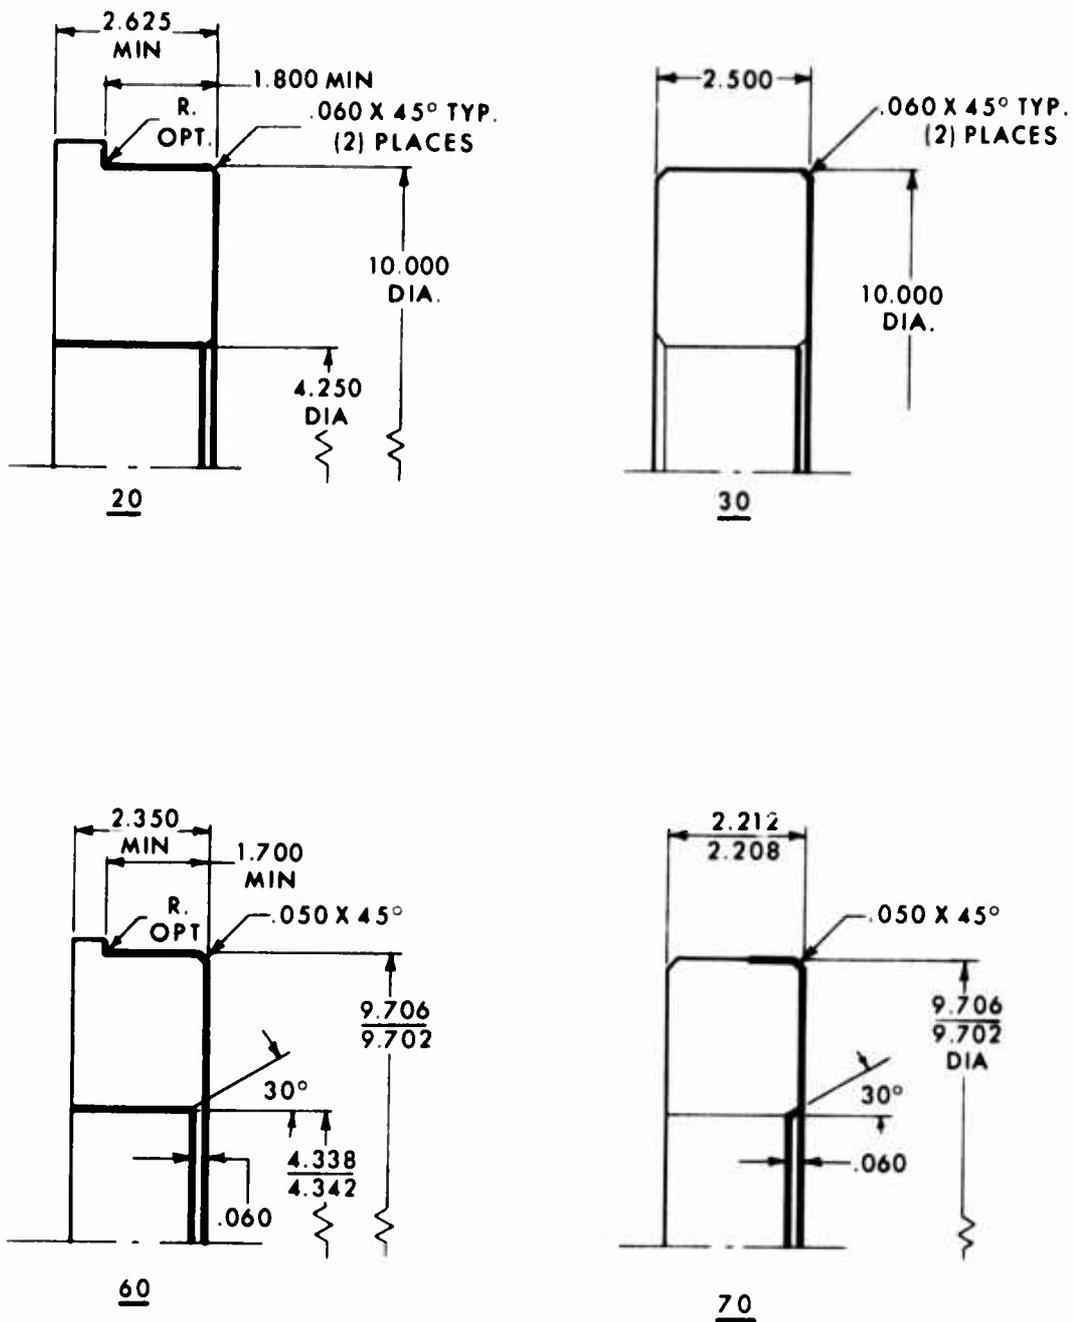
, RG351-11278-103: Machine Operation Drawing (Sheet 1 of 2).
